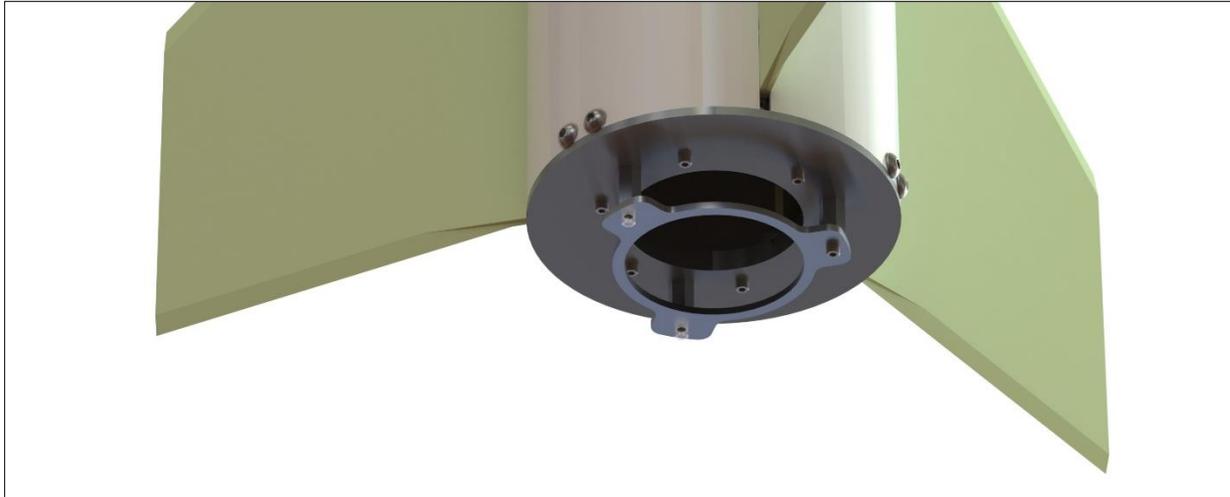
Thrust Plate Flange Interface with Lower Airframe Body Tube
